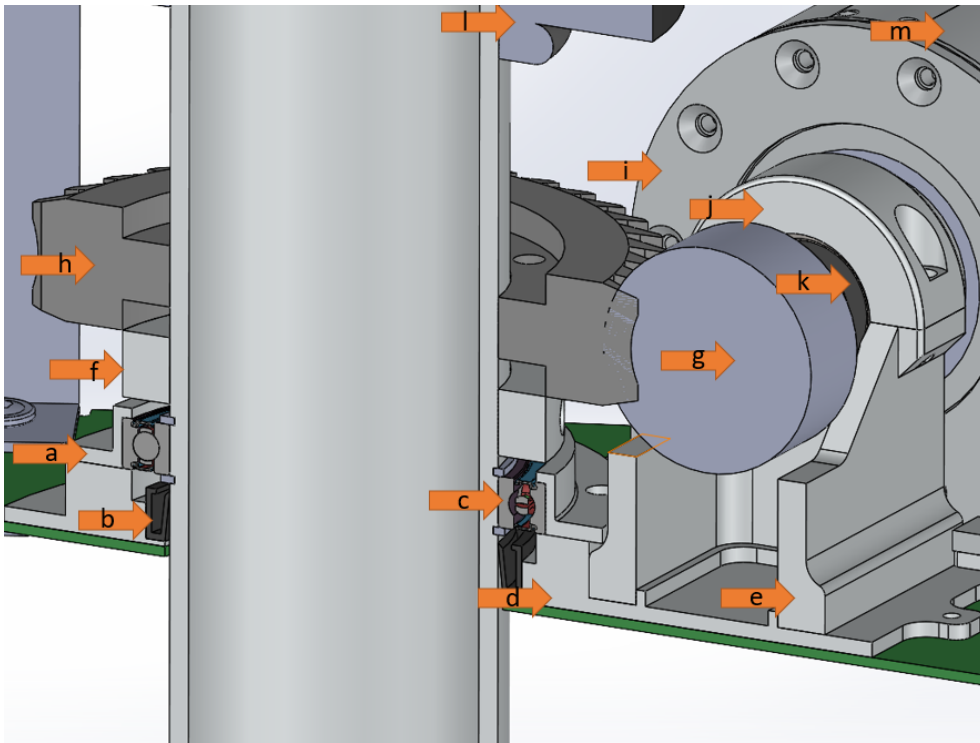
(a) Mast bearing cap. (b) Simmer ring. (c) Mast bearing. (d) Bottom plate. (e) Shaft bearing support structure, lower. (f) Gear ring. (g) Worm. (h) Worm gear. (i) Motor support bracket. (j) Shaft bearing support, upper. (k) Shaft bearing. (l) Slip Ring (m) Actuator.
